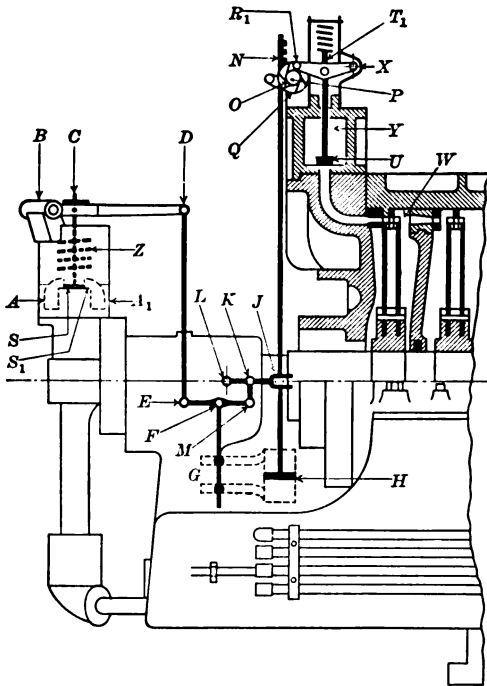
CURTIS HYDRAULIC VALVE GEAR.
